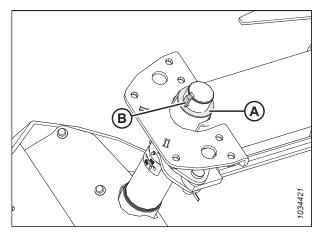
Caster Wheel Extension – Left Cab-Forward
